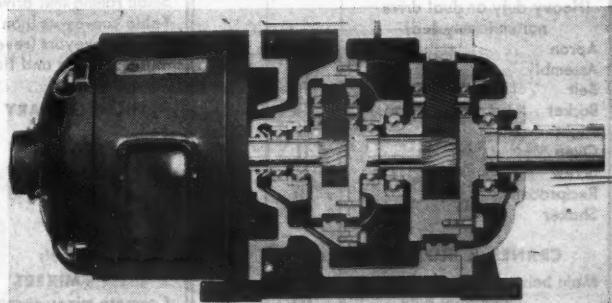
Planetary gear arrangement employed in a double reduction Integral type of gearmotor. Note compactness of complete unit.
